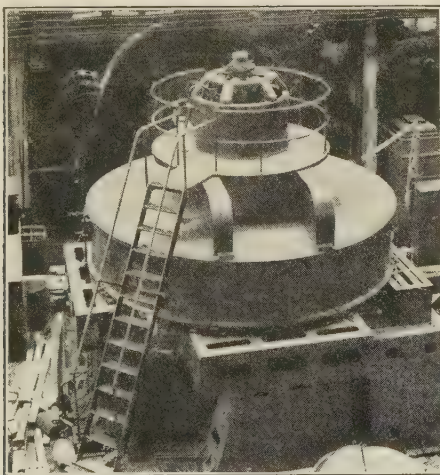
VERTICAL WATER-WHEEL DRIVEN GENERATOR PRACTICALLY ENTIRELY WELDED
